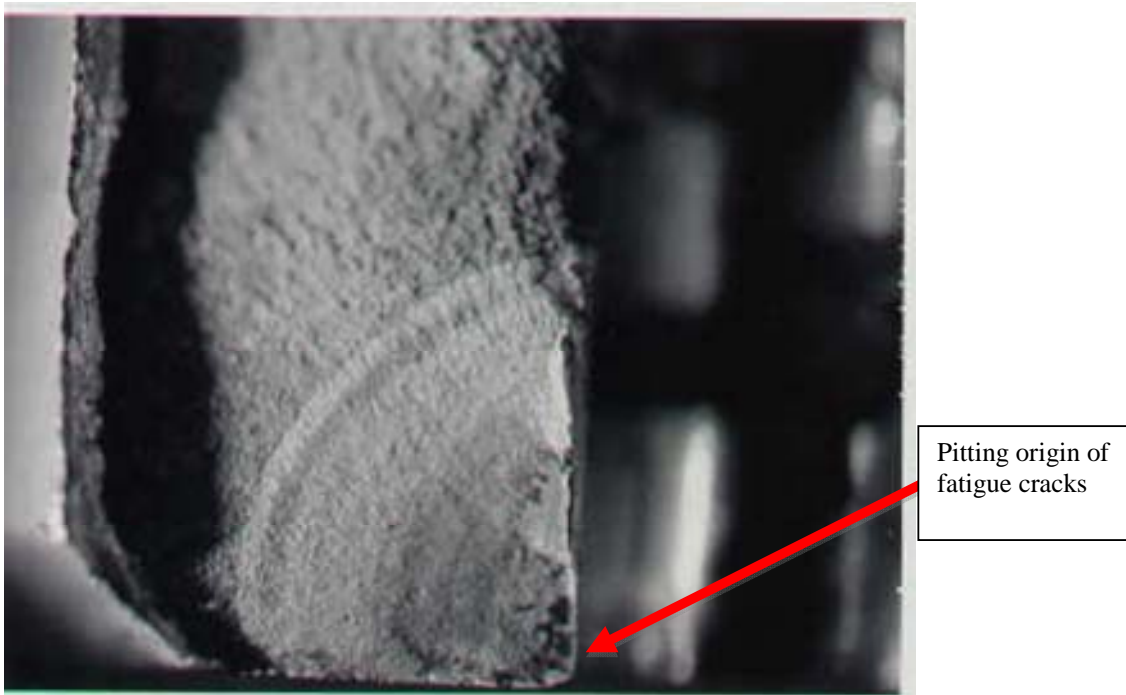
Fracture Surface of C130 “Porkchop” Fitting that Unexpectedly Failed from Pitting that Transitioned into Cracks.
